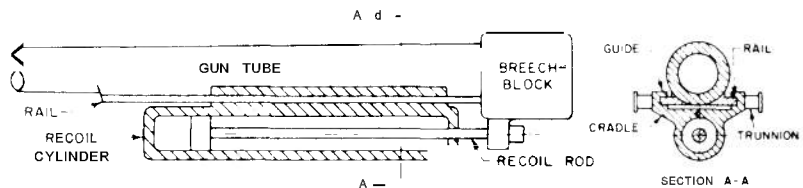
U-Type Cradle With Integral Recoil Mechanism
